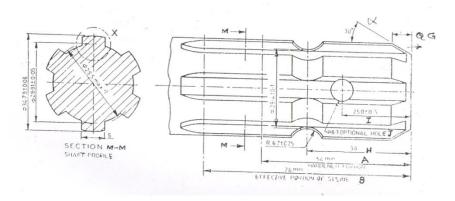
Dimensions of Implement Power Input Shaft, mm
